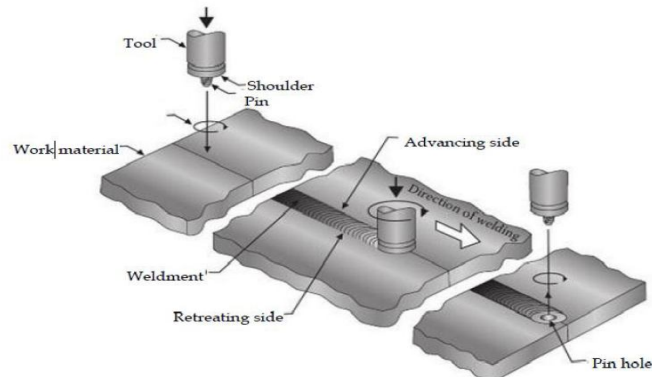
Friction stir welding process phases of a butted work material configuration
